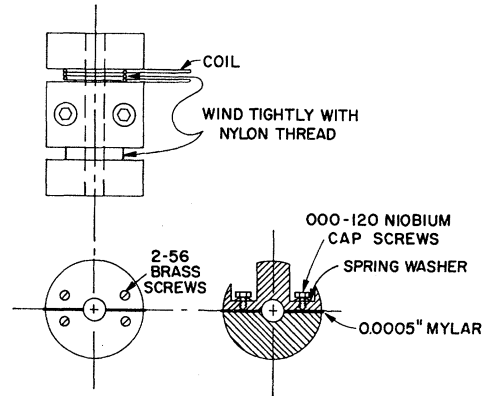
Drawing of the weakly connected ring showing construction details. The drawing is not to scale.
